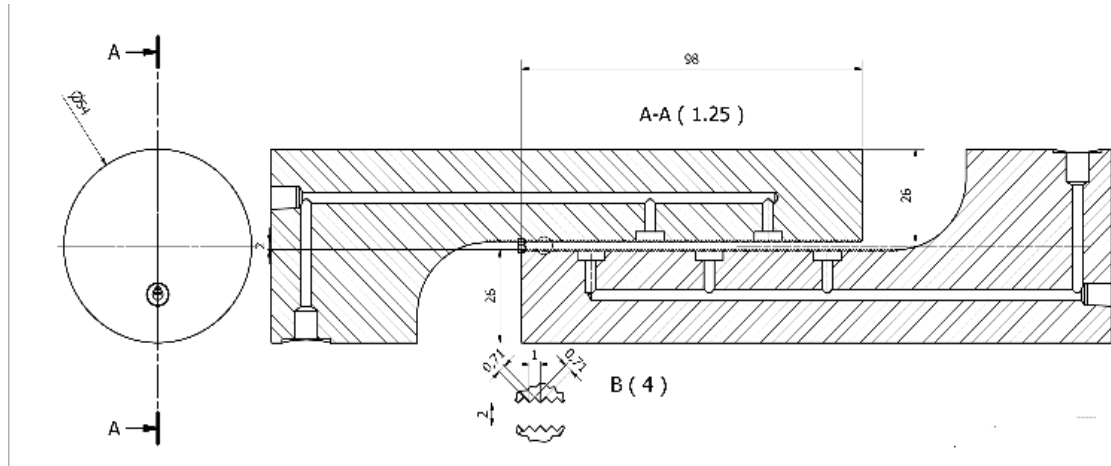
Sketch of the sliding holder designed for the MTS Triaxial apparatus. The diameter is 53.92 mm and the overlapping surfaces are 98 mm.
